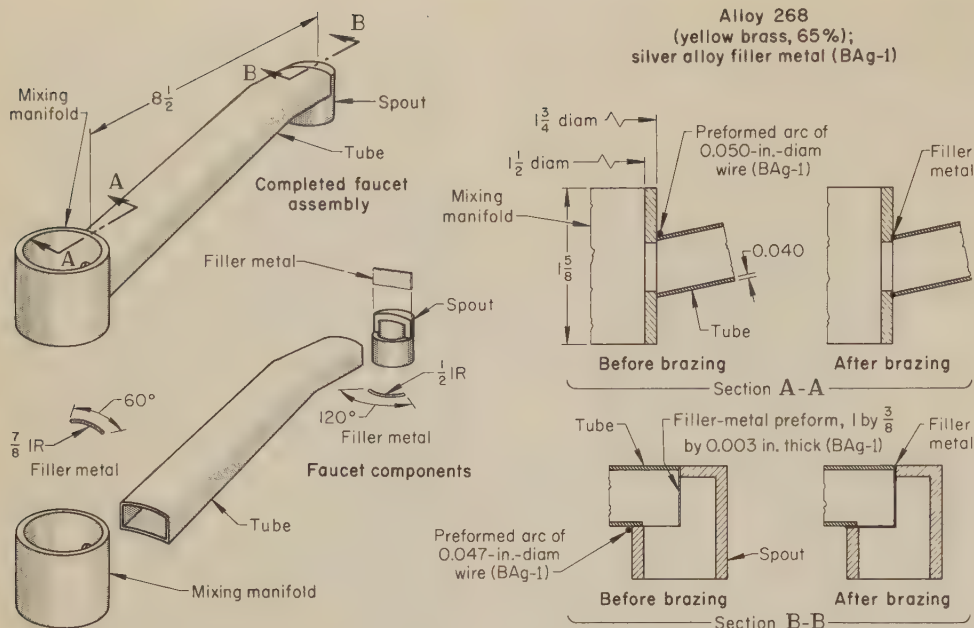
Torch brazed faucet assembly that replaced a complex casting (Example 641)
